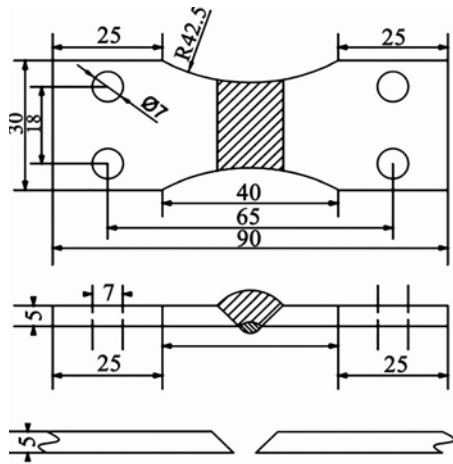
Schematic overview of the welded plate and sample dimensions.
